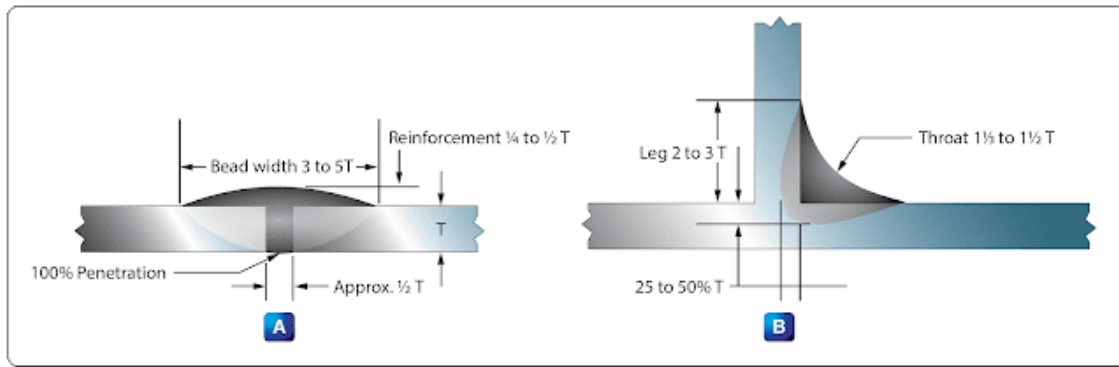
Butt weld (A) and fillet weld (B), showing the width and depth of the bead
